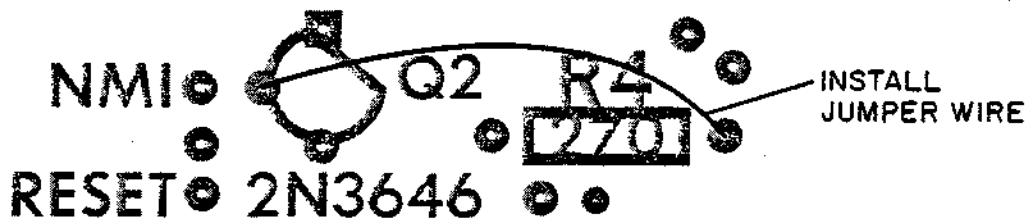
R4 - Q2 JUMPER WIRE PLACEMENT
